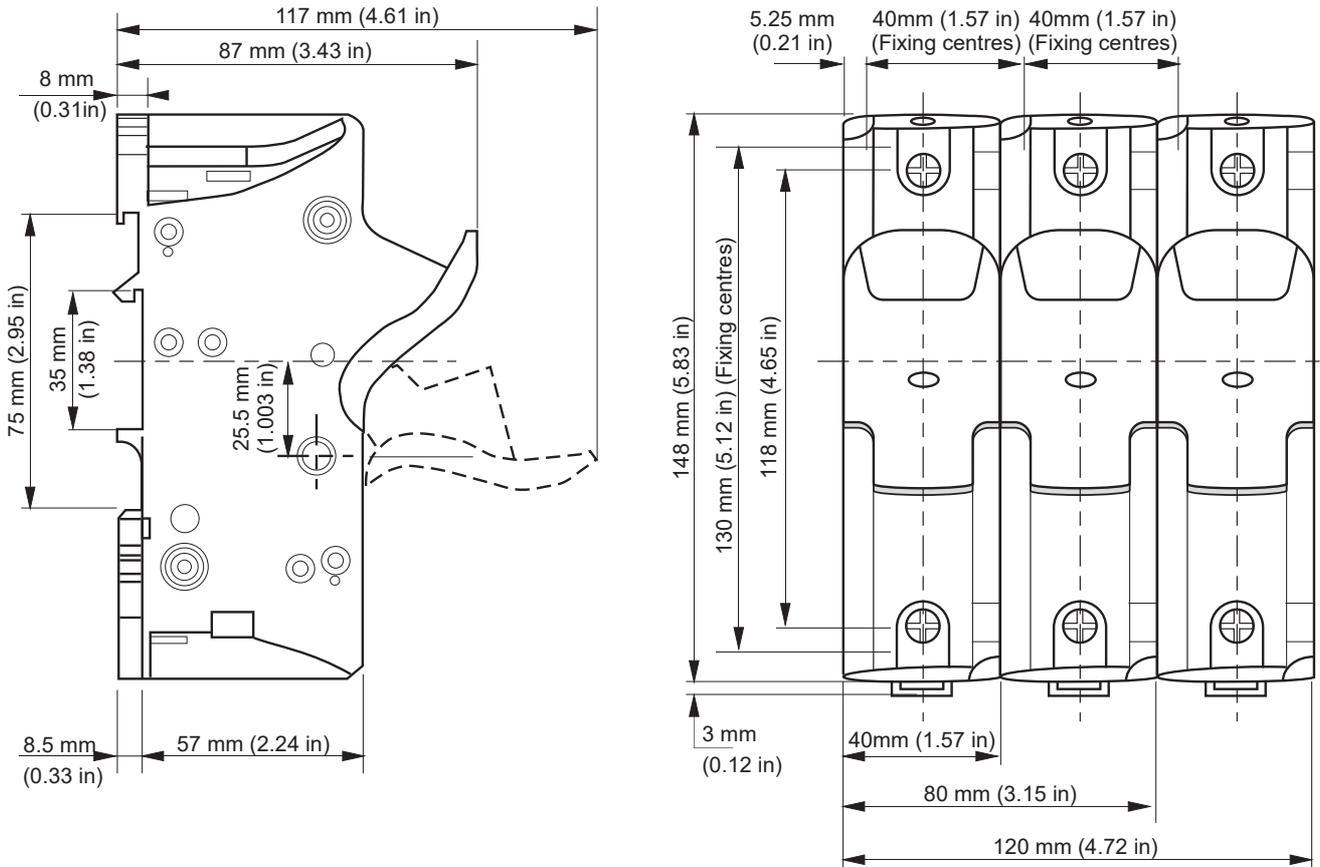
Fuse holder dimensions: US271 (27x60mm)
